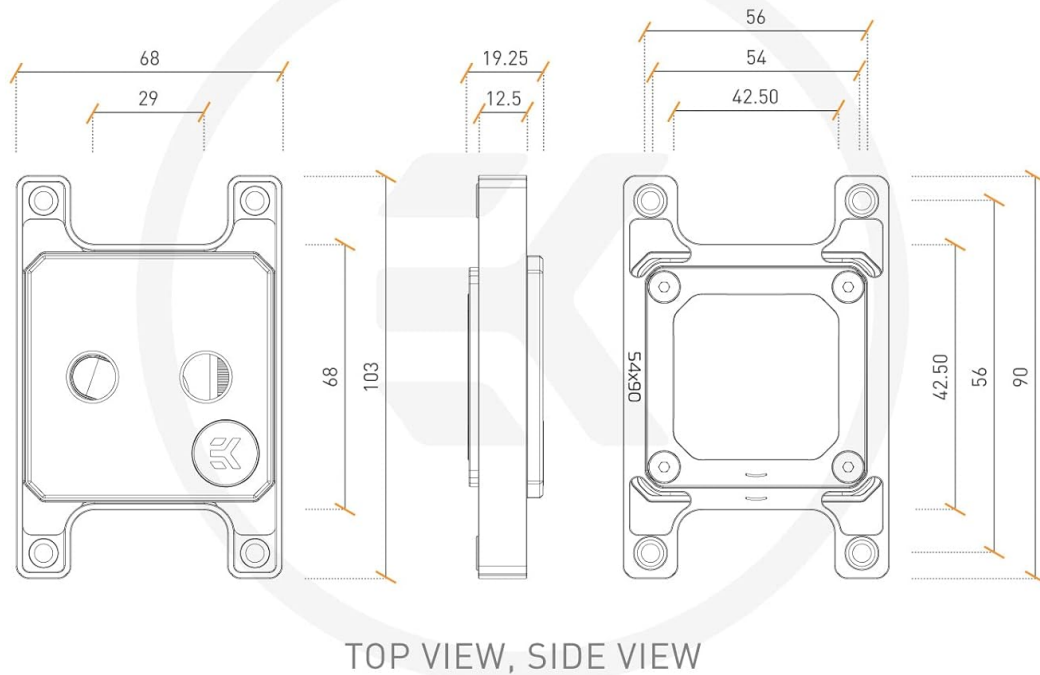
Technical drawing providing precise dimensions and port locations for the EK-Quantum Magnitude water block.
